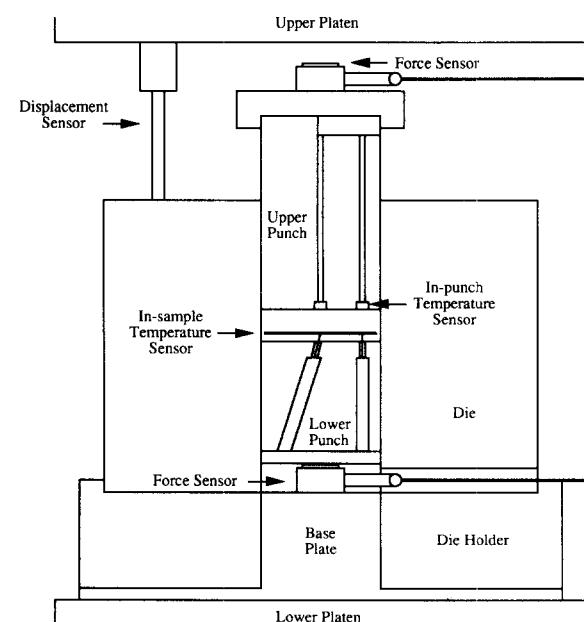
Cross-sectional view of the plexiglass punch and die assembly.
